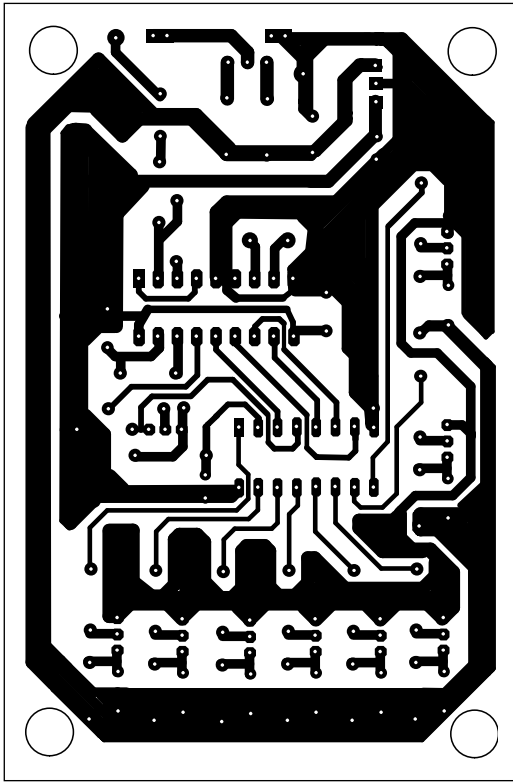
Actual-size, single-side PCB layout for the decoder circuit
